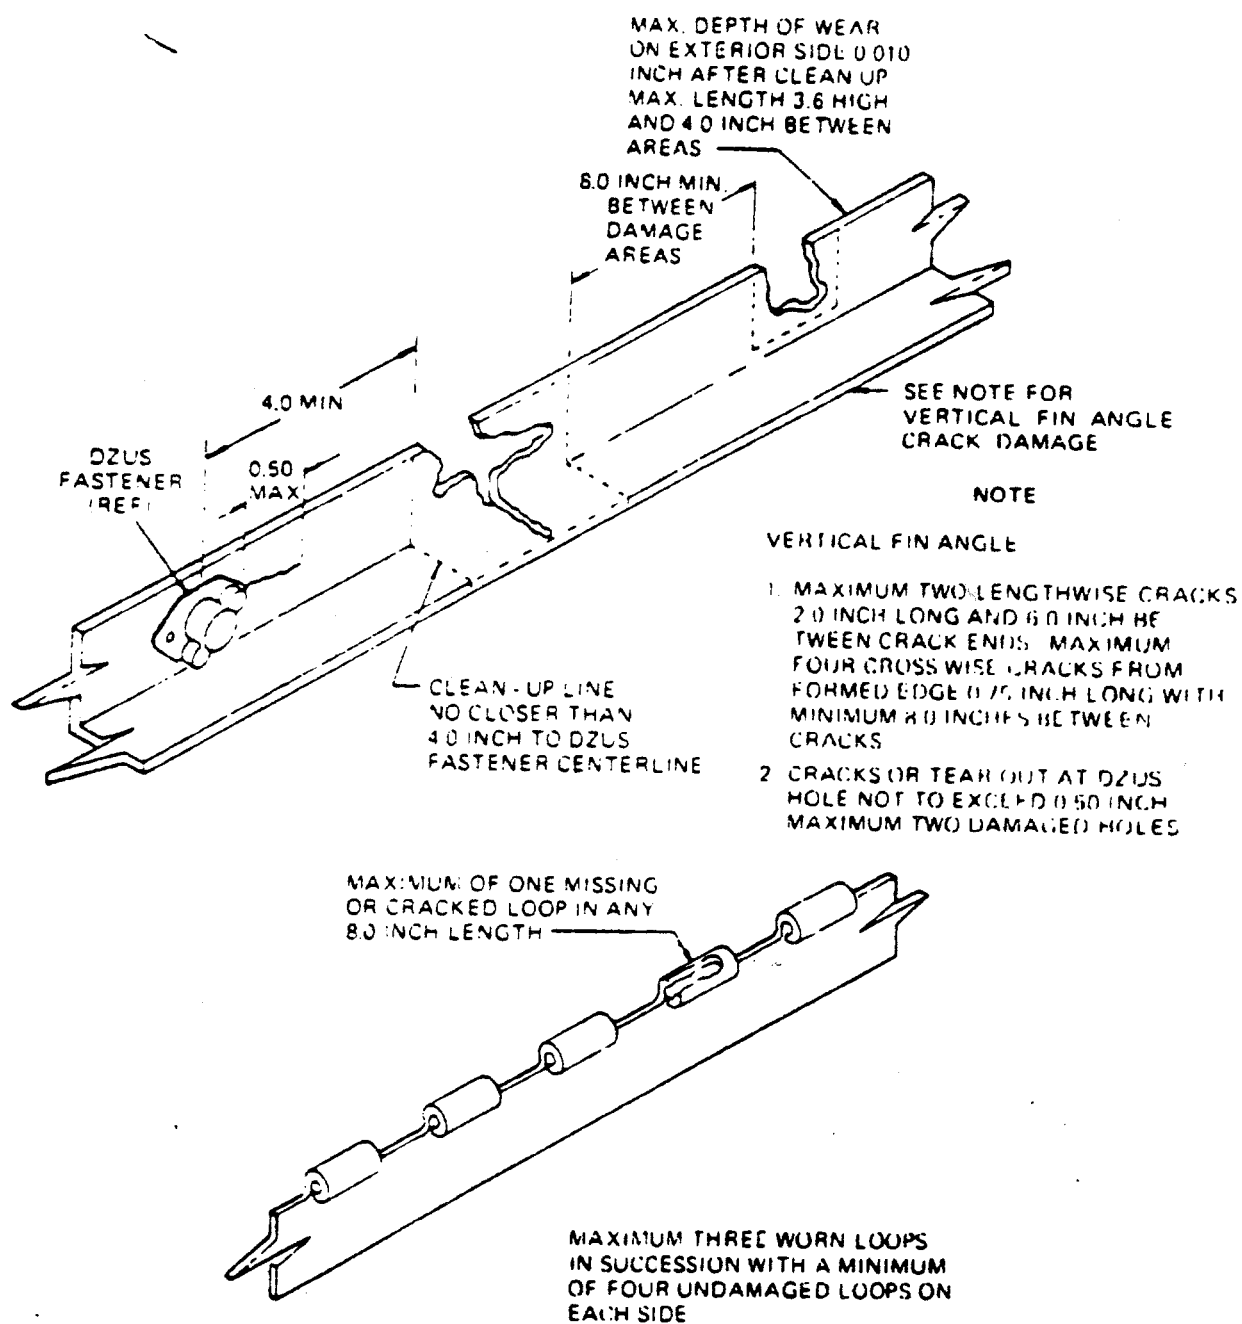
A Drive Shaft Cover Hinges and Angles Damage Limits
